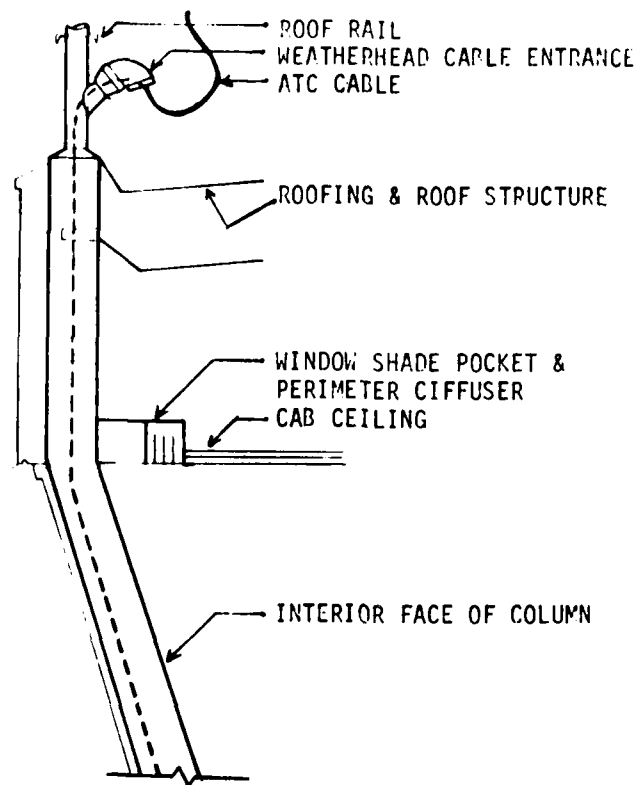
Scheme one--ATC cable trough layout (above support floor ceiling).
